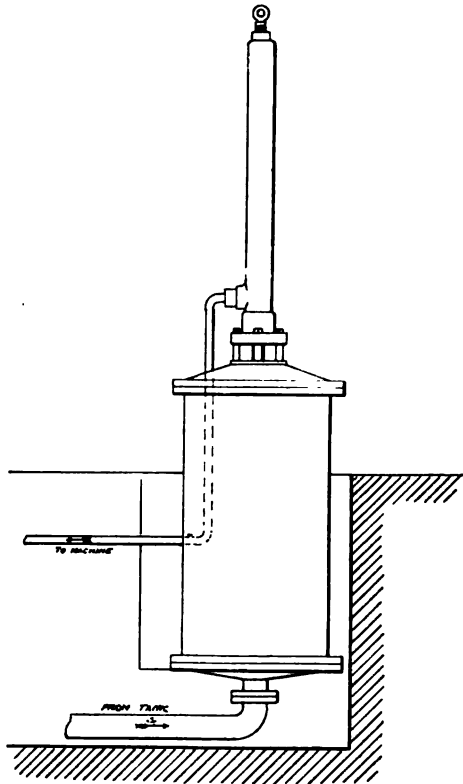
ARRANGEMENT OF INTENSIFIER IN THE OWENS COLLEGE TESTING MACHINE.
